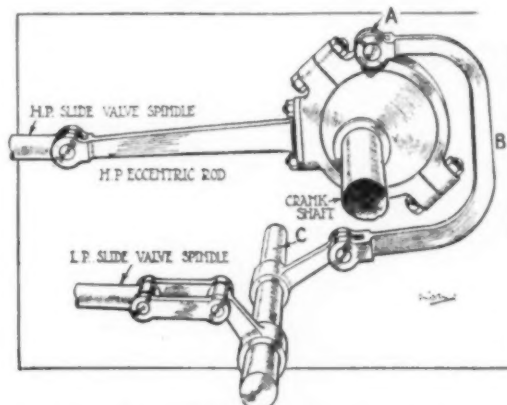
VALVE GEAR OF THE STEAM ENGINE IN THE BROTHERHOOD STEAM WAGON
